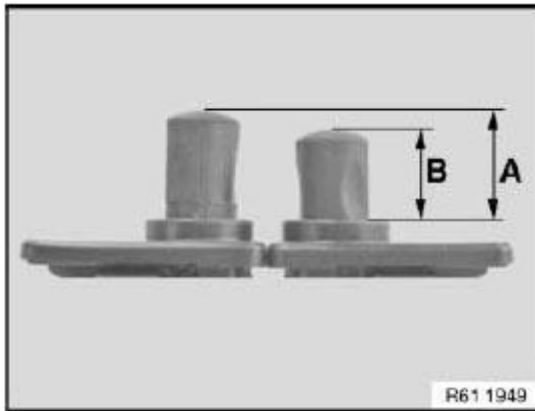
Identifying Engine Hood/Bonnet Basic Setting And Workshop Mode
